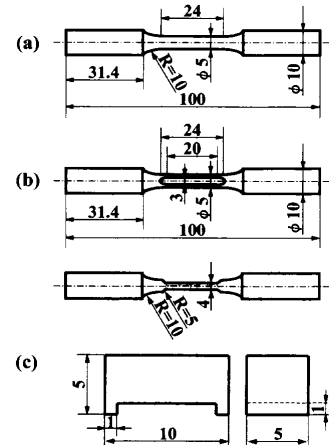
Schematic drawings of (a) tensile and plain fatigue specimens, (b) fretting fatigue specimen and (c) fretting pad in mm.
